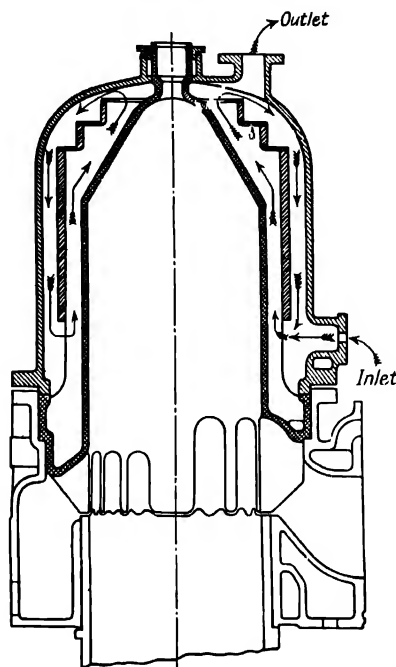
WATER AND STEAM CIRCULATION IN STILL ENGINE CYLINDER JACKET
